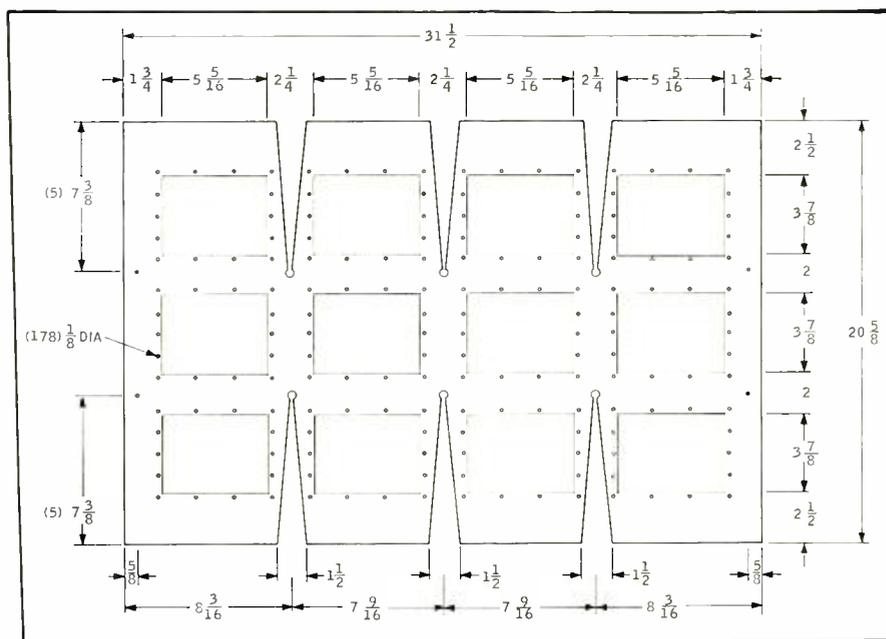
Dimensions of the flexible tweeter mounting sheet. The linen bakelite sheet is 3/64-in. thick.
